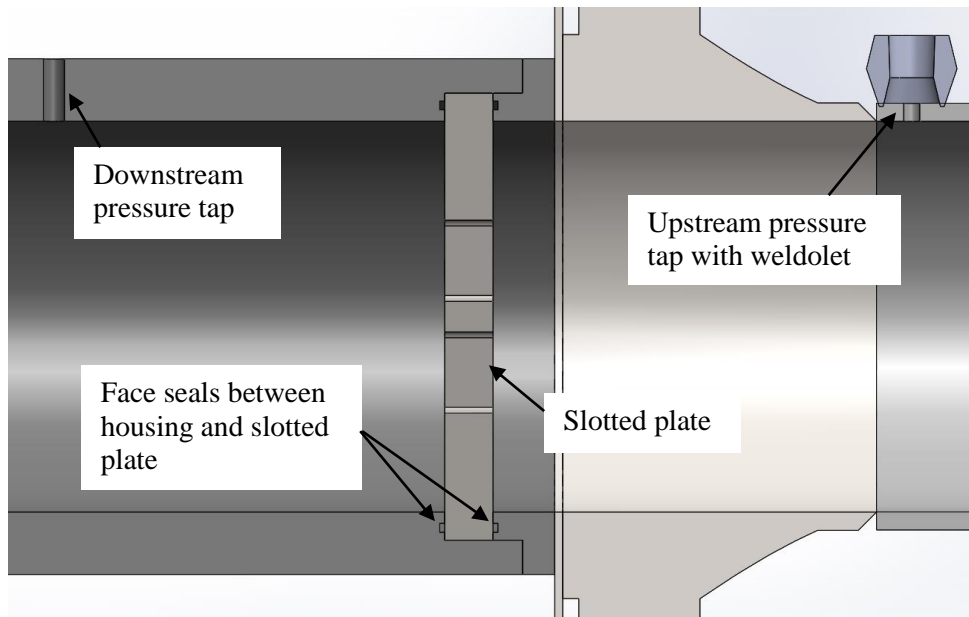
Radial cross sectional view to show slotted plate sealing detail and pressure taps
